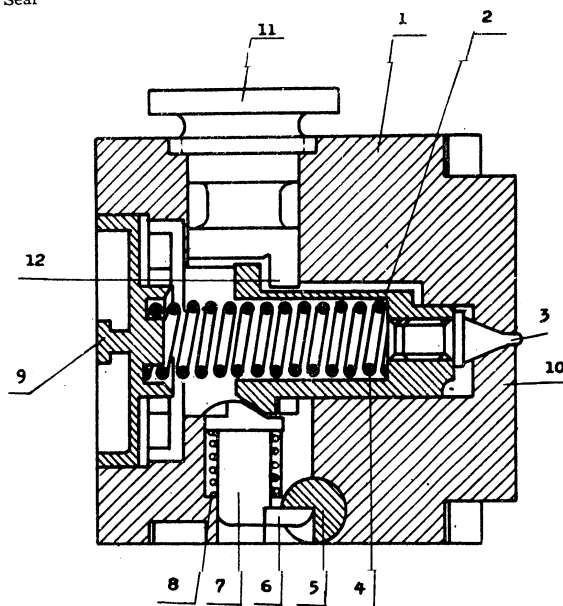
BREECHBLOCK ASSEMBLY SECTION (WITHOUT THE FRONT PLATE)
